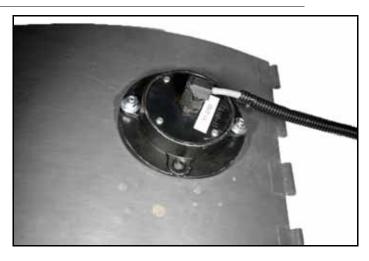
Example of Moisture Sensor Mounting Location and Hole Drilling
